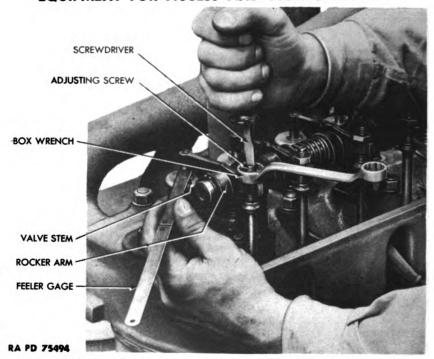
Adjusting Compressor Unit Engine Valve Tappets
